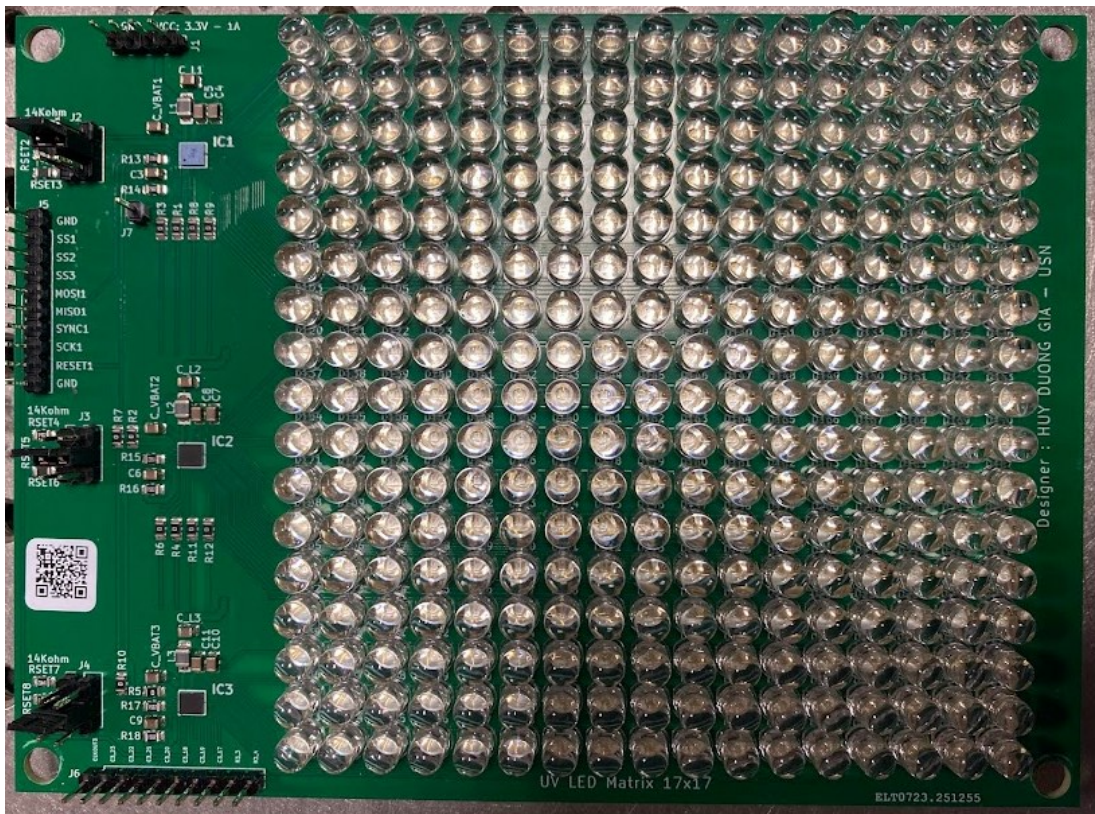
Our complete PCB of custom drive electronics with 17x17 UV LED matrix. The PCB size is 15x11cm. Four corner holes are designed for mounting.
